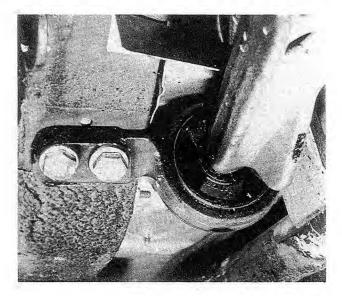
Bracket for rubber bushing mounts to underbody with two bolts.
